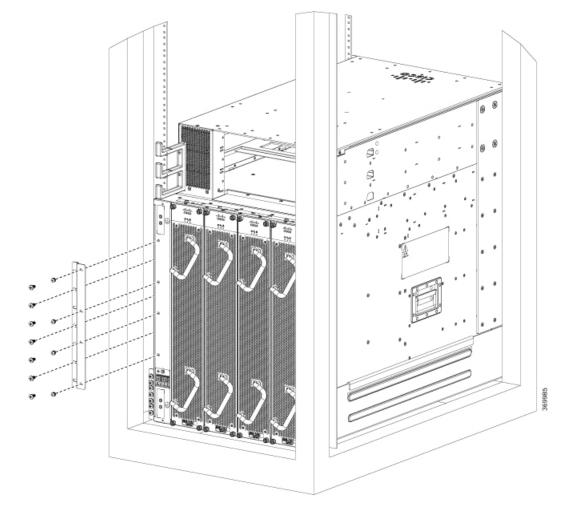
Attach 8812 Chassis to Rack - Rear Right View
